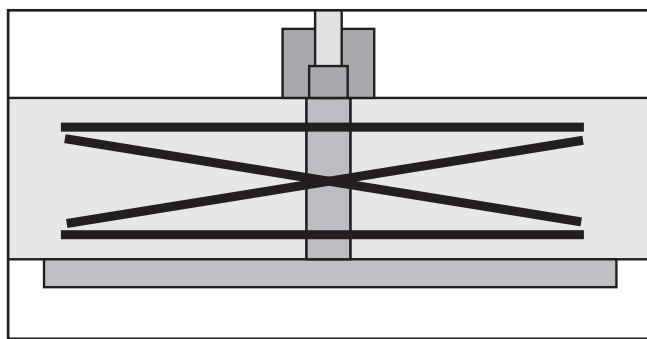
Straightedge positions for checking infeed/outfeed table parallelism.
